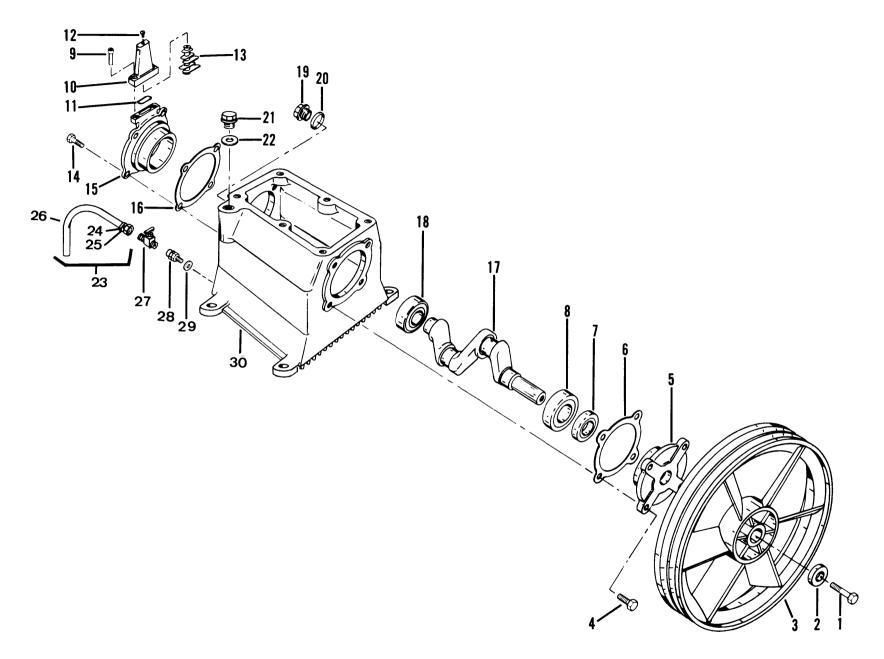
Flywheel, crankshaft, bearings, seal, and frame
